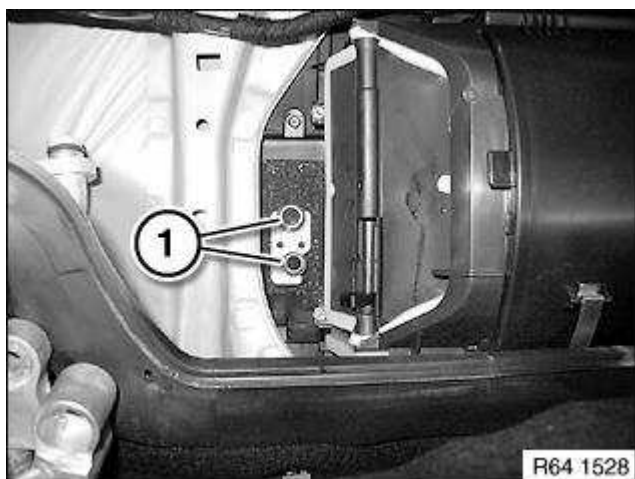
Replace Sealing Rings (1) And Coat With Refrigerant Oil
